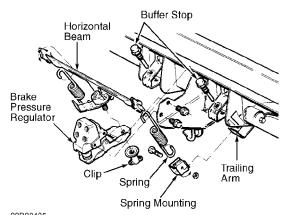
Identifying Brake Pressure Regulator Components Courtesy of Volkswagen United States, Inc.
